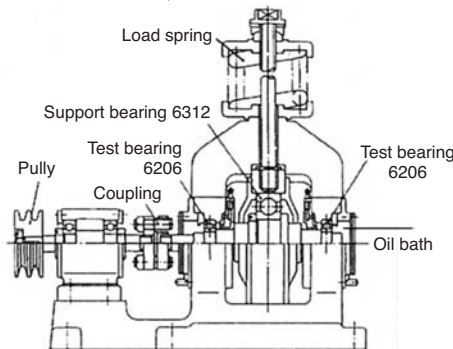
Schematic drawing of rolling contact fatigue life tester for ball bearings
